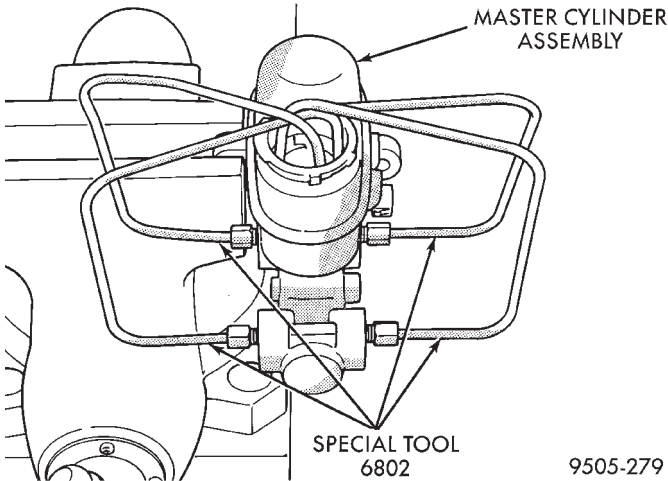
Bleeding Tubes Attached to Non-ABS Master Cylinder
